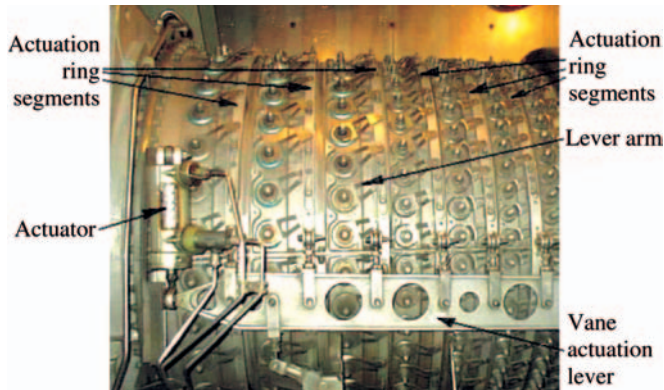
Elements of the angular setting control system of blades of particular guide vanes of the LM 2500 engine's compressor
